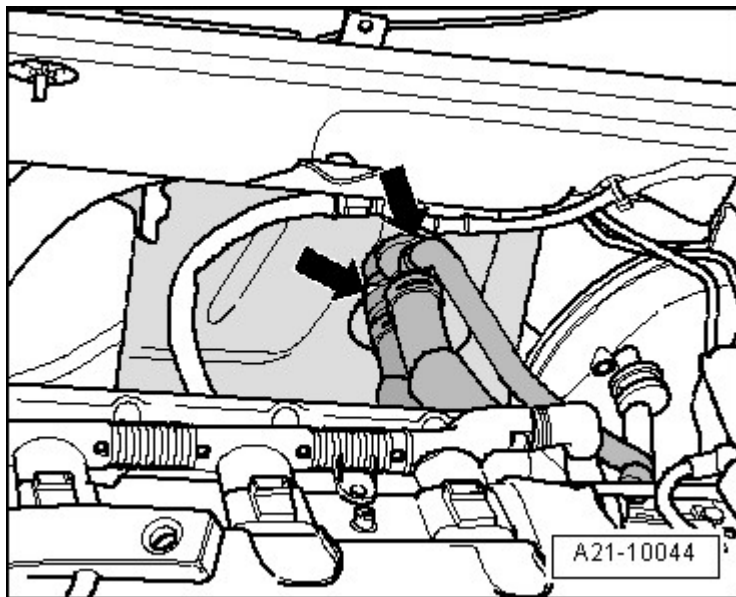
Disconnecting Coolant Hoses To Heater Core At Bulkhead
